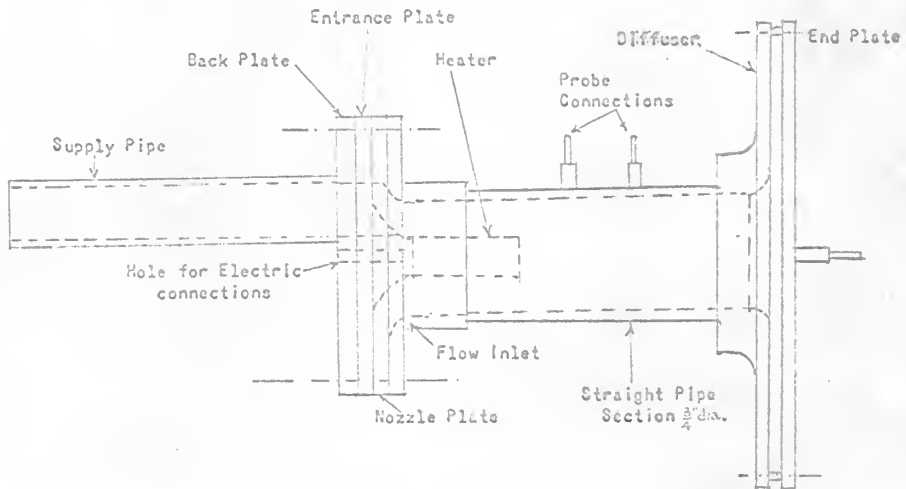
Vortex Tube Cooler (Source Ref. 4)
